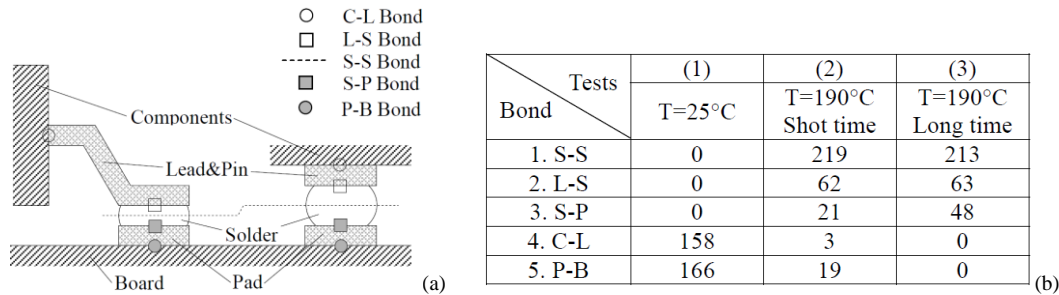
(a) Disbonding types of a gull-wing-typed IC component (left) and a BGA component (right). A common damage occurs when a lead or a solder ball breaks from a component (C-L bond breaks). (b) Counts of different disbonding types of BGA components in disassembly tests profiles experiments (1), (2) and (3). Both figures were extracted from [126].
